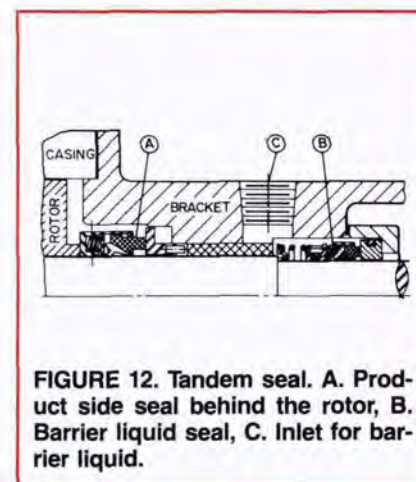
Tandem seal. A. Product side seal behind the rotor, B. Barrier liquid seal, C. Inlet for barrier liquid.
